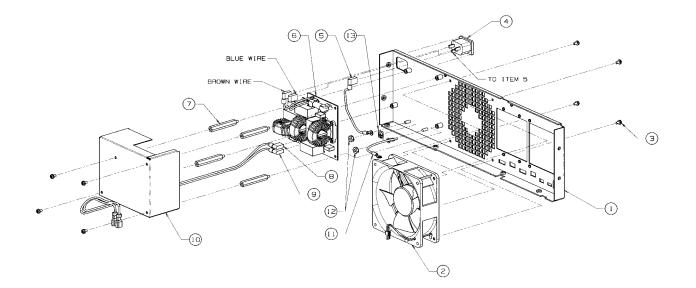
CE4000 Back Panel Assembly (Exploded View)
